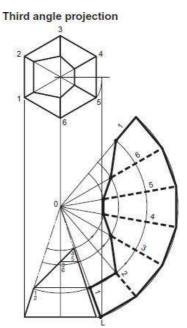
Developing of a hexagonal frustum with an oblique cut
